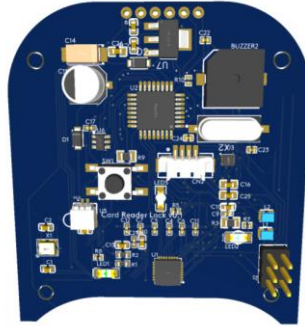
3D View of PCB with Atmega48P and DRV8837 motor driver
